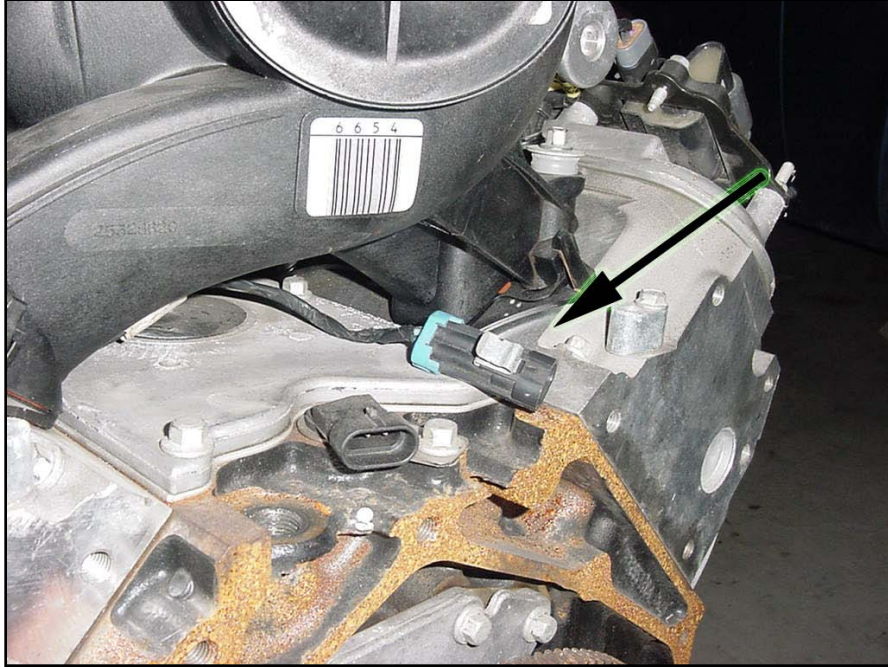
Knock Sensors (Two below Intake Manifold)
